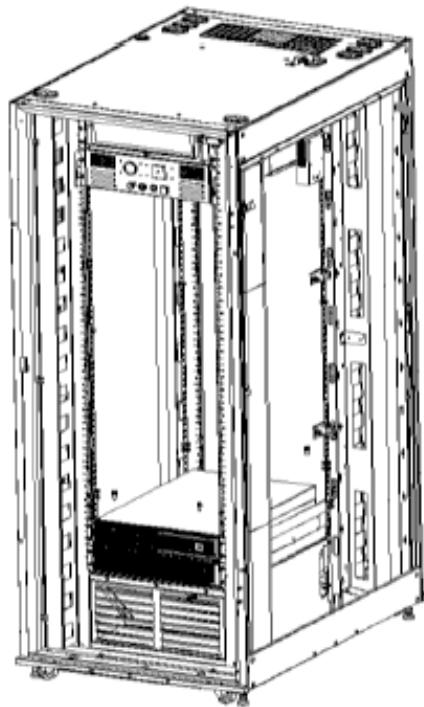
Box of the 800mm wide standard unit – Installation area at the front door
